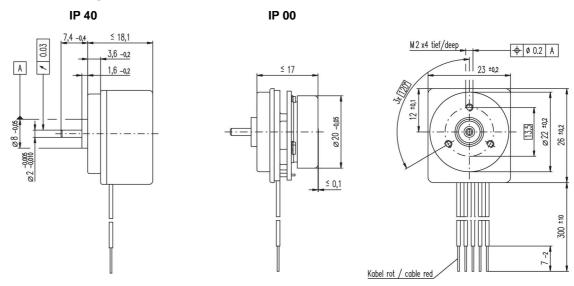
2 Watt version – Dimensional drawing [mm]
